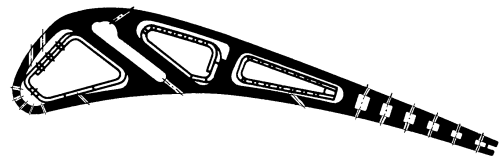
Design of the cooled guide-vane of the high pressure gas turbine (first stage) on the engine RD-33 [4]
